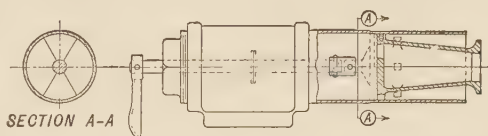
Nozzle for raw producer gas burner, with valve for regulating induction of gas.
